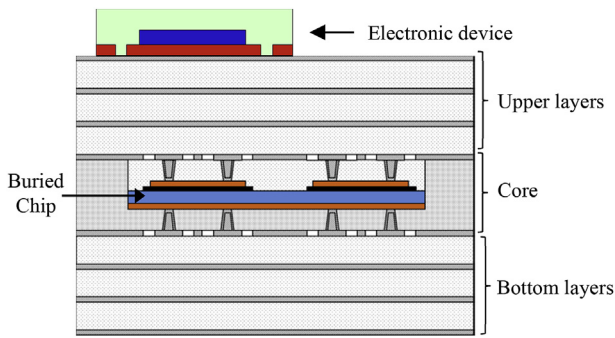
Schematic cross-section of a buried chip into a Printed Wired Board.
